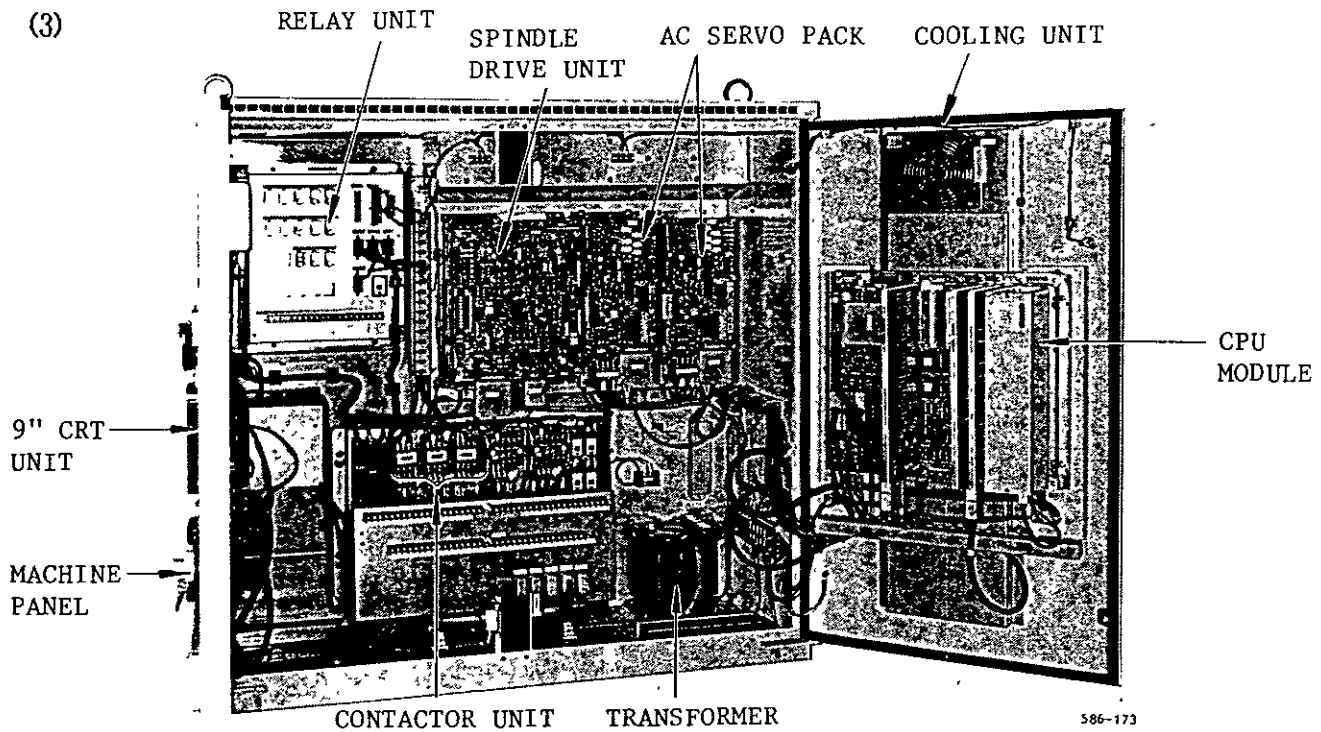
Example of Unit Assembly with High Voltage Units
